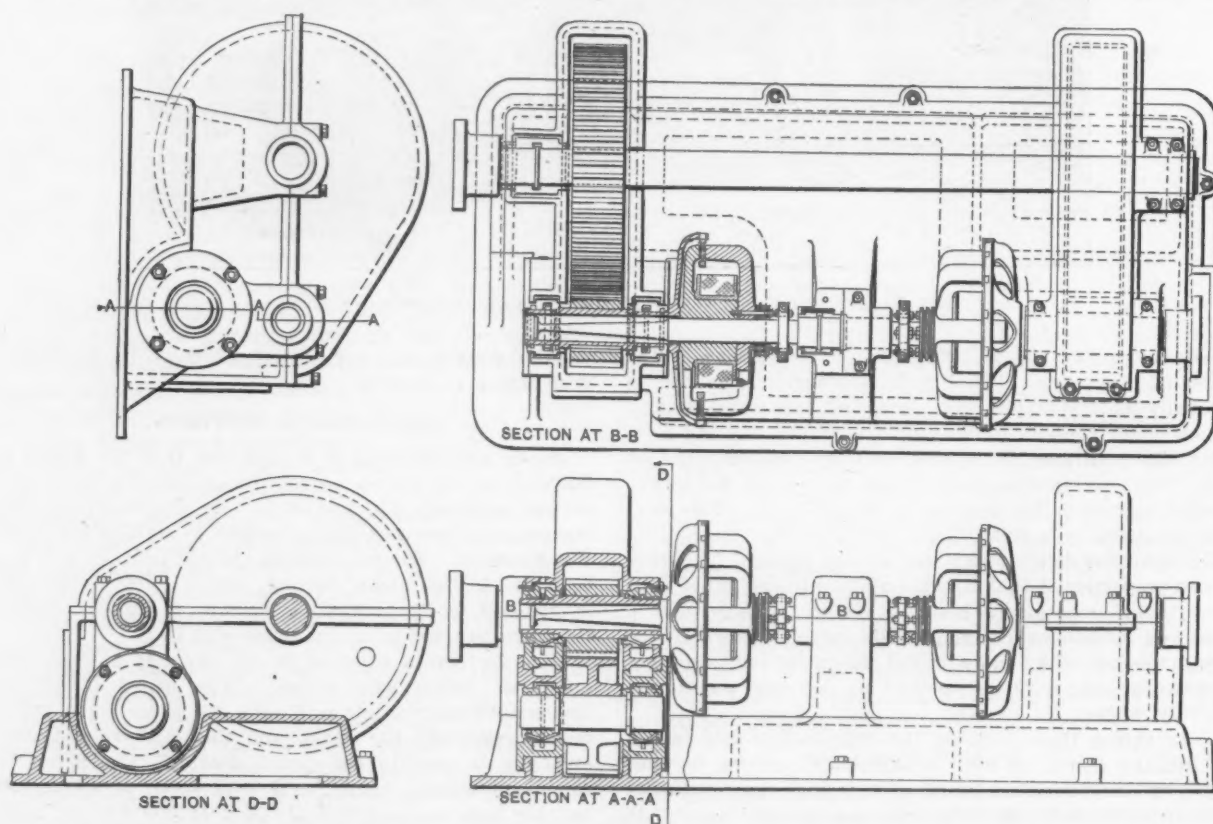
Details of a Reversing Drive Built Independent of the Motor and Intended to Be Connected to It at One End.
